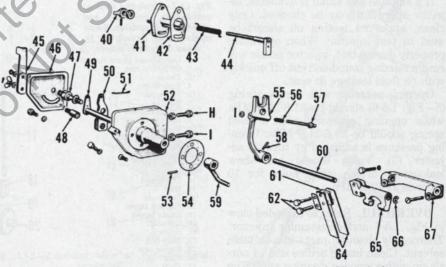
Exploded view of governor and control linkage. Governor fork (65) contacts governor cup (31 - Fig. L5-7).
